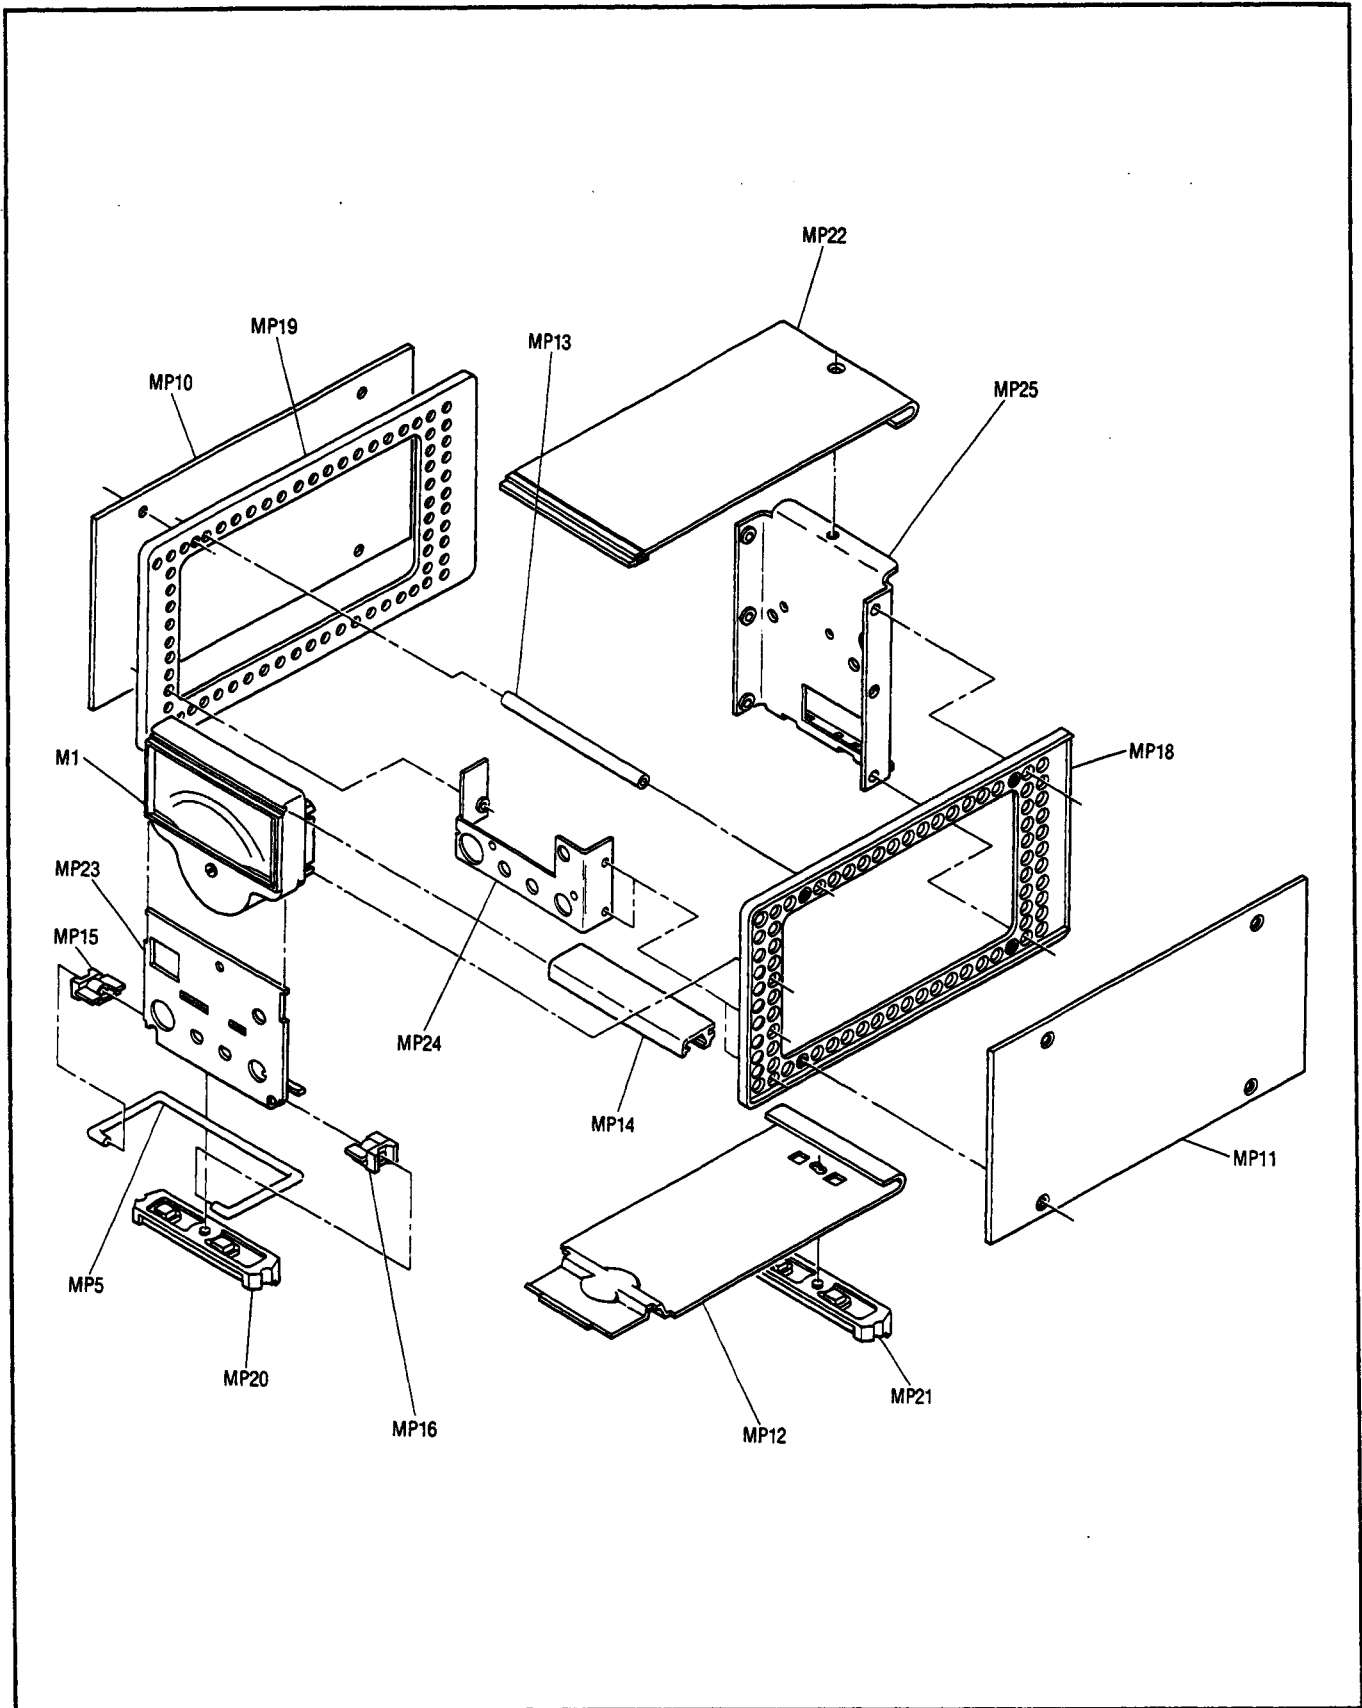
Cabinet Parts Illustrated Parts Breakdown
